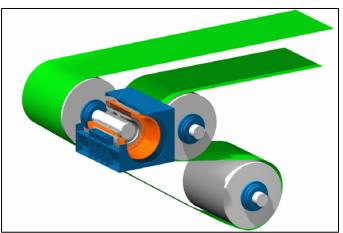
Gearless Conveyor Drive (GCD) Configuration with 1 Motor/Drive Pulley.
